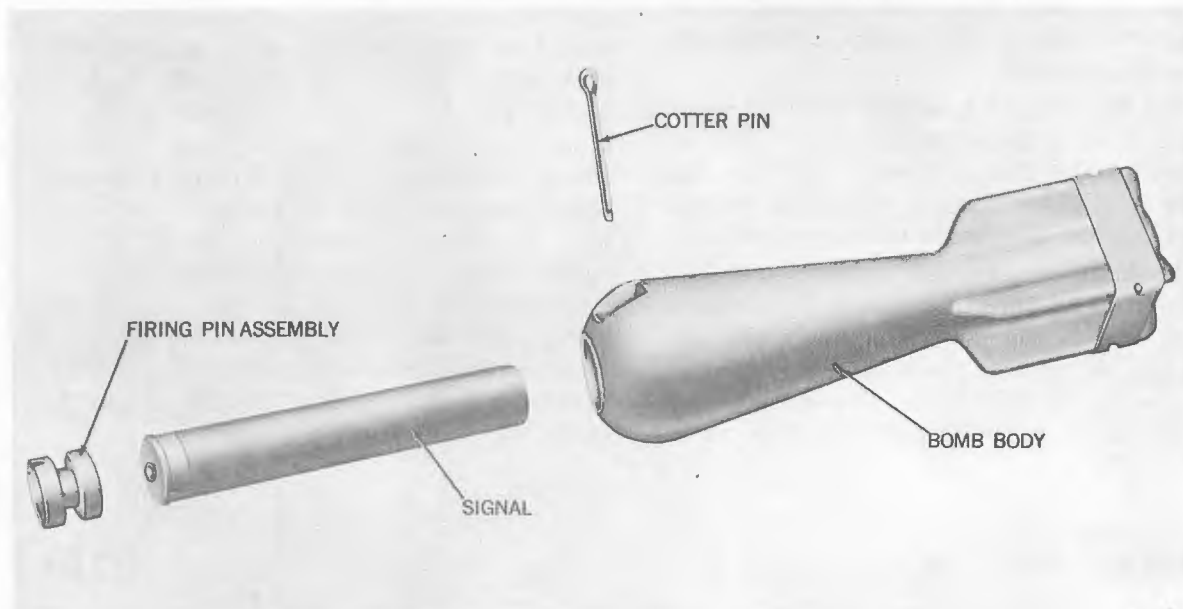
3-lb Miniature Practice Bomb AN-Mk 23 Mod 1, Exploded View.
